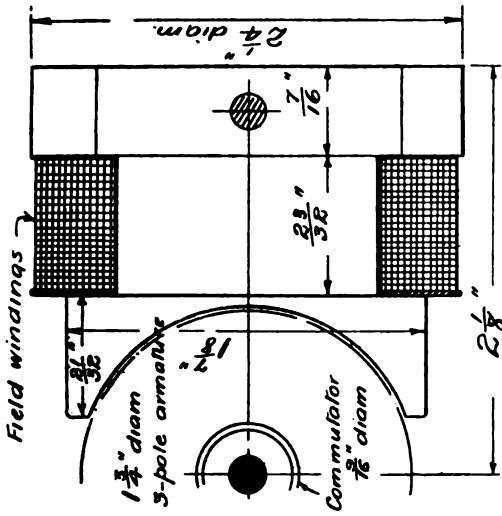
PLAN OF POLE-PIECES, SHOWING WINDING SPACE. (Scale: Full size for 2-in. gauge locomotive.)
